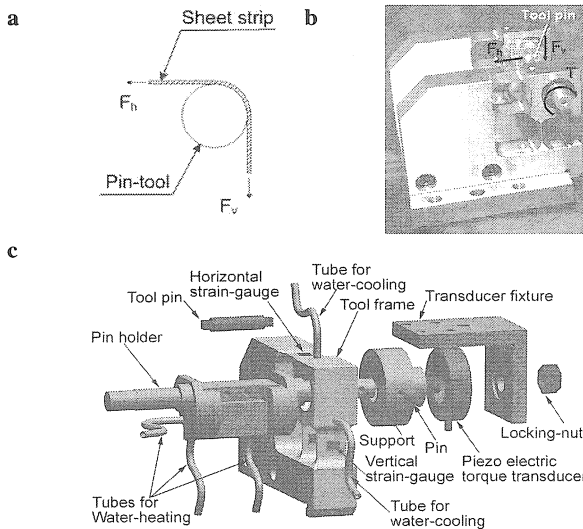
(a) Schematic outline of BUT test, (b) exploded view of the BUT equipment, (c) forces and torque acting on the tool-pin during testing
